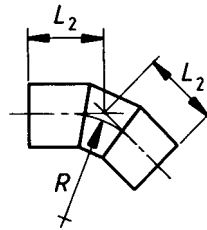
Gusseted bend type 2, over 30° up to 60°
